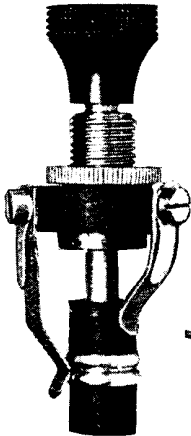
This is a high-grade type of sliding switch for panel mounting
